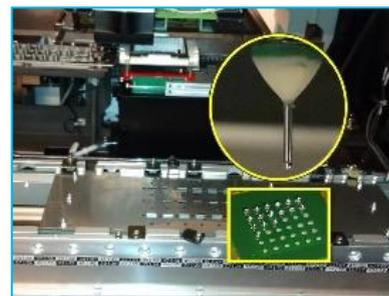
Automatic solder spheres placing on solder pads using pick and place machine and special head [19].
